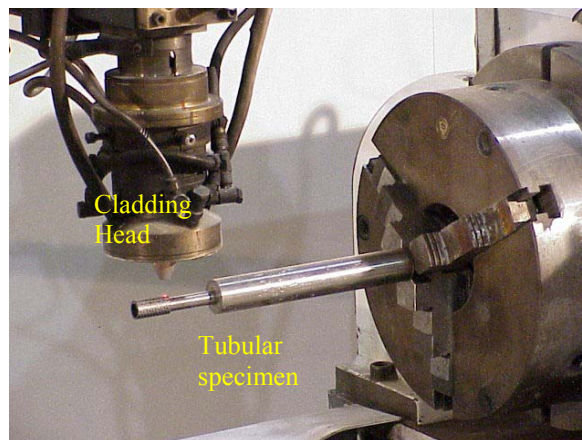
Typical rotary shaft sample holder and laser cladding head.
